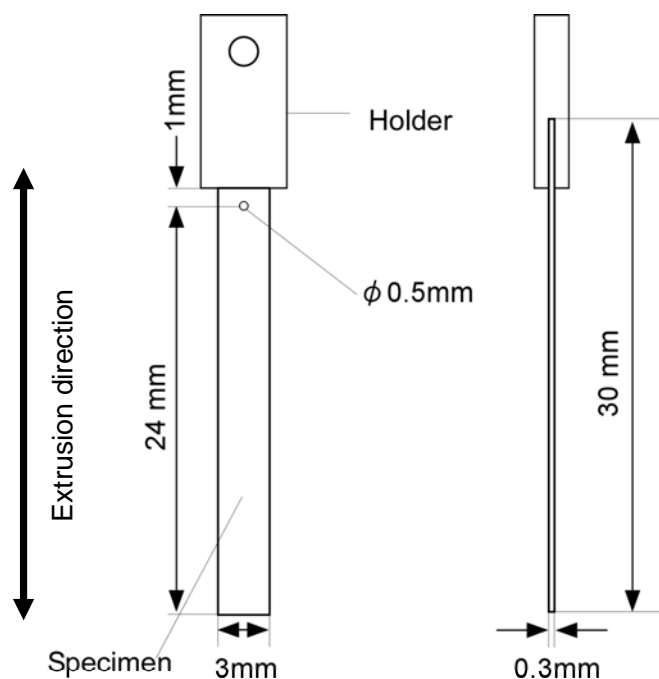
Shape and dimensions of the fatigue test specimen.
